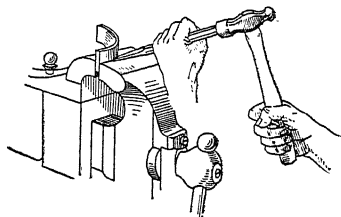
Shearing thin material with vise jaw and cold chisel.
